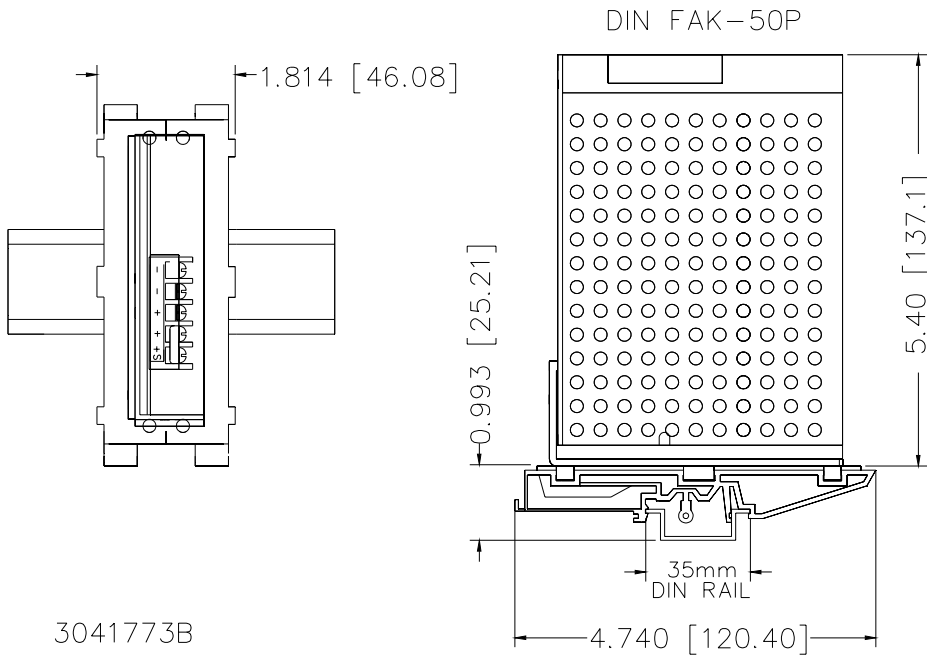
FAK 50W POWER SUPPLY WITH KIT INSTALLED, OUTLINE DIMENSIONS
